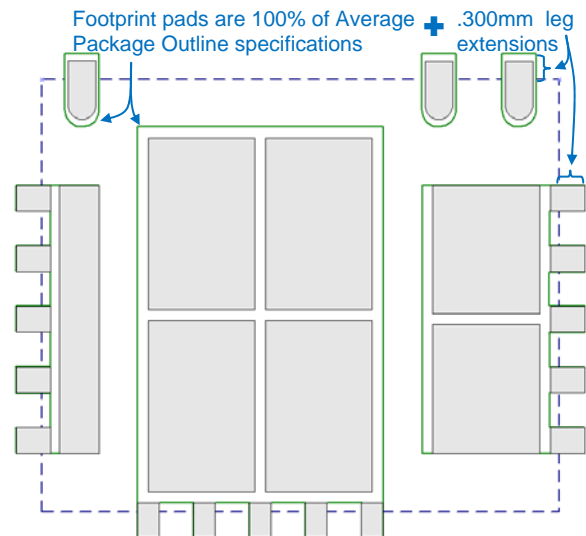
Overall view of Footprint, Stencil and Device Outline
